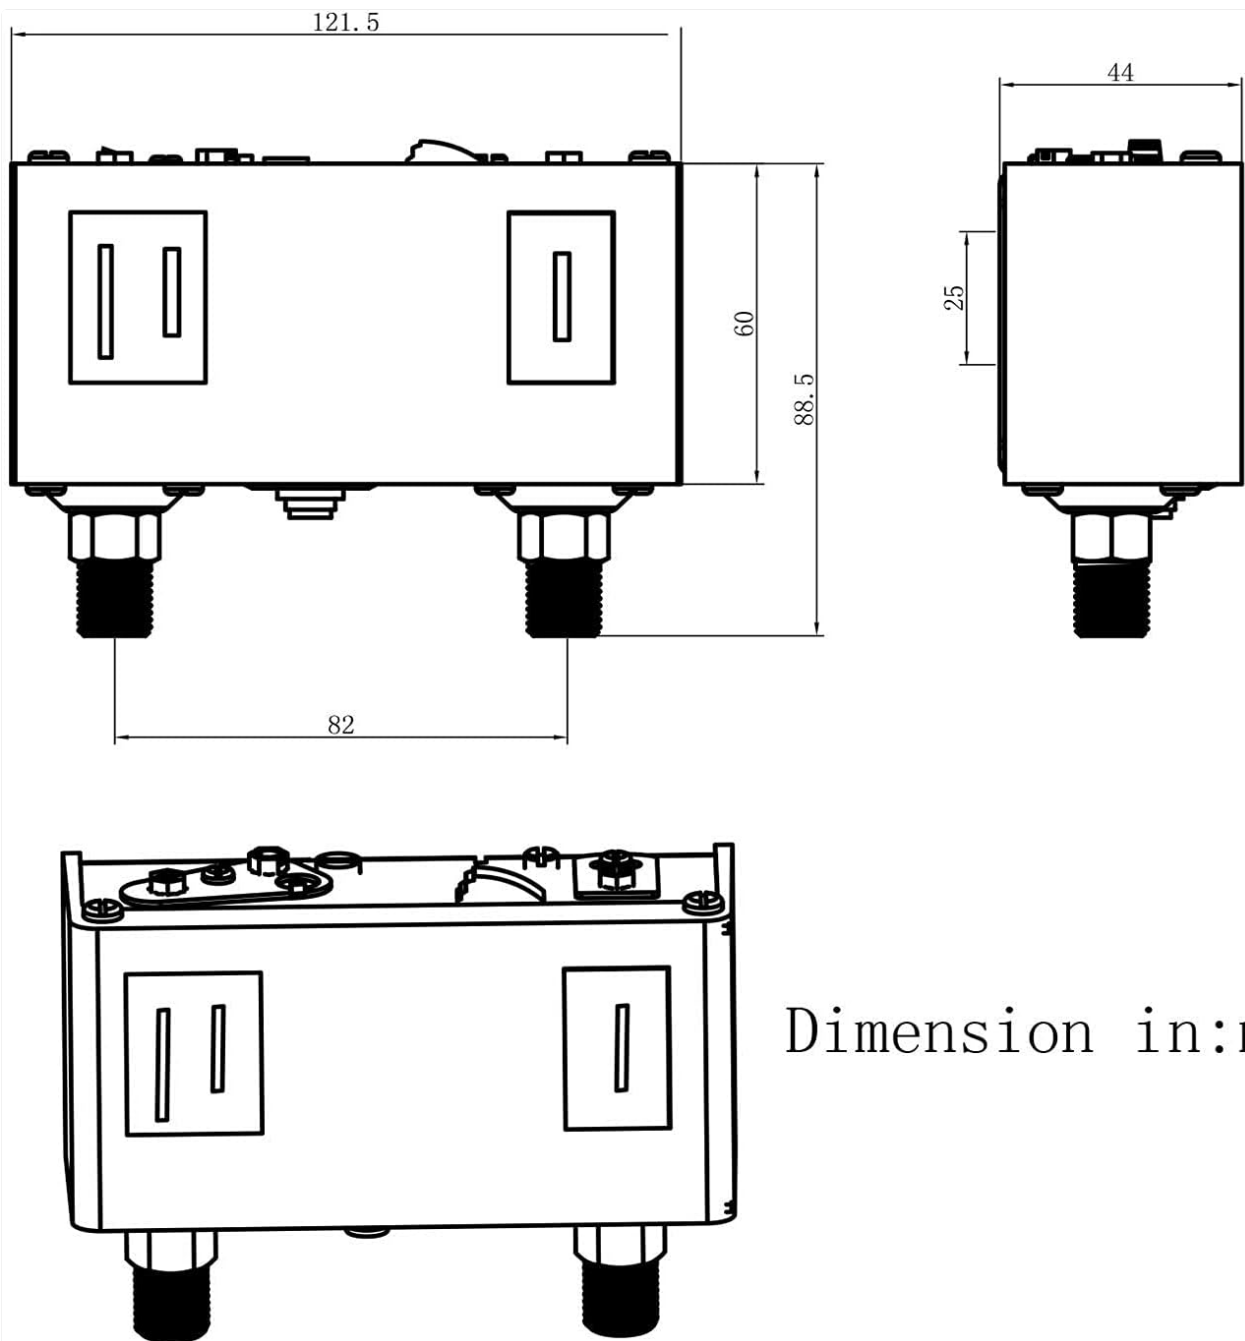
Dimensional drawing of the LEFOO LF58, with measurements provided in millimeters.
